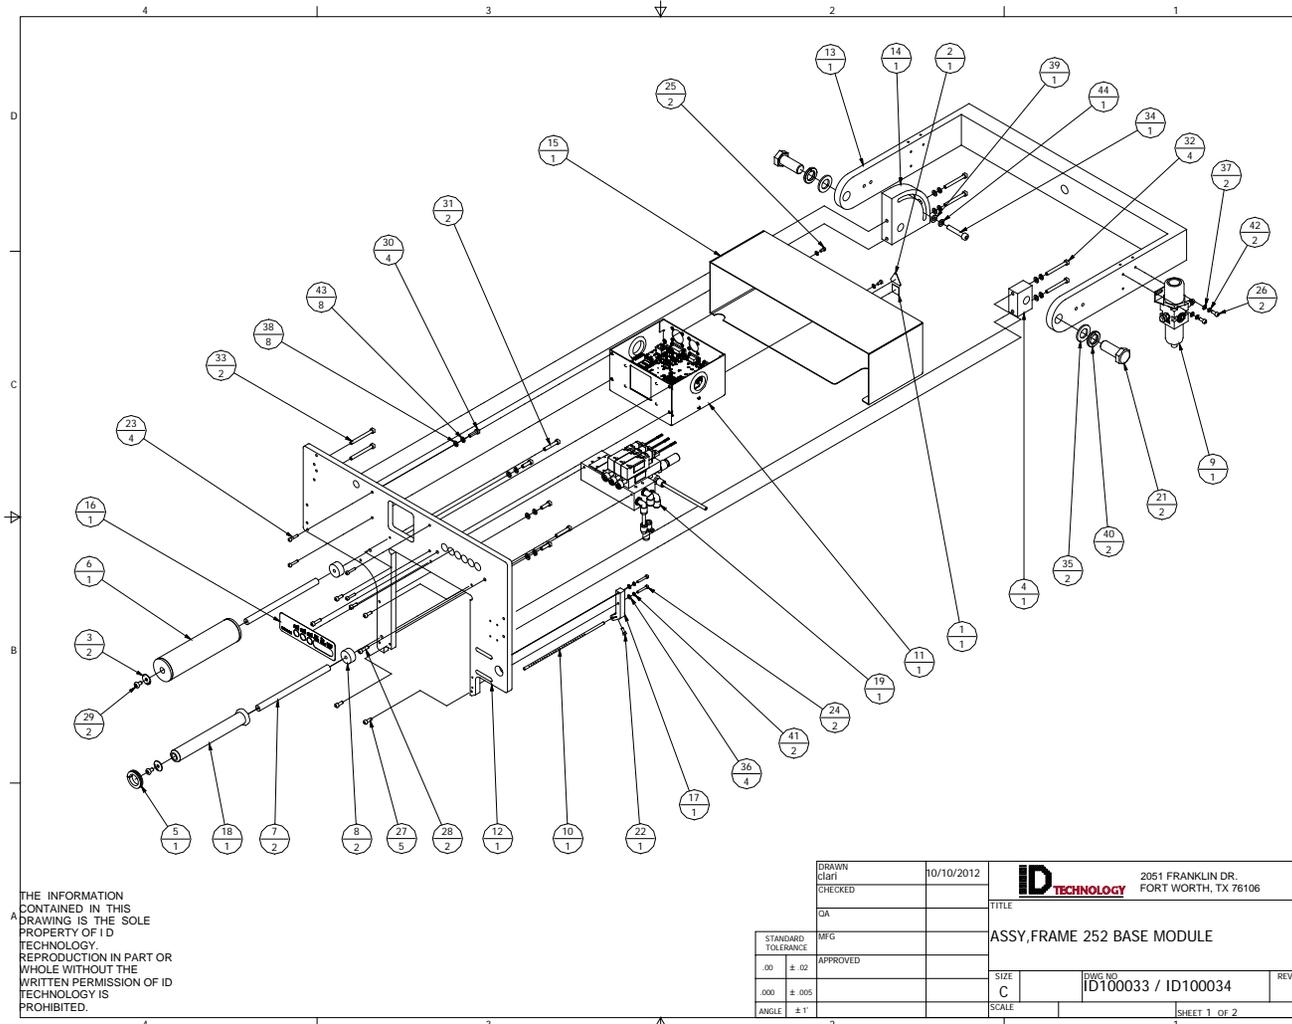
Exploded View, 252 Faceplate Assembly ID100033/ID100034
